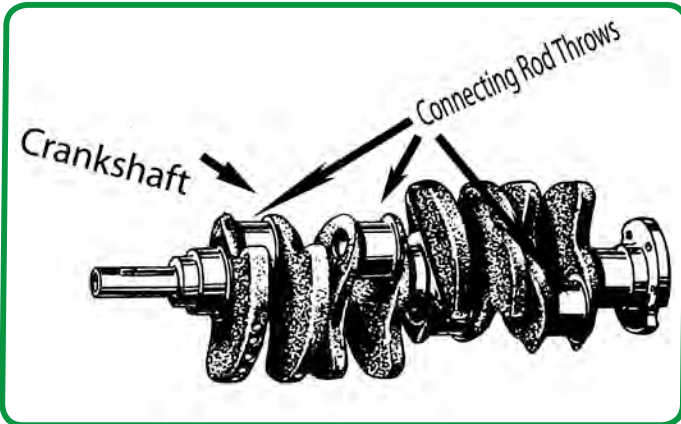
A Crankshaft showing the crankshaft throws where the connecting rods are attached.
